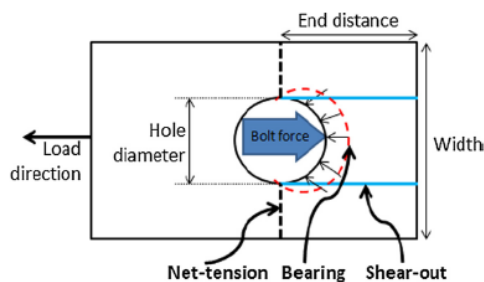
Type of failure modes in composite bolted joint.
